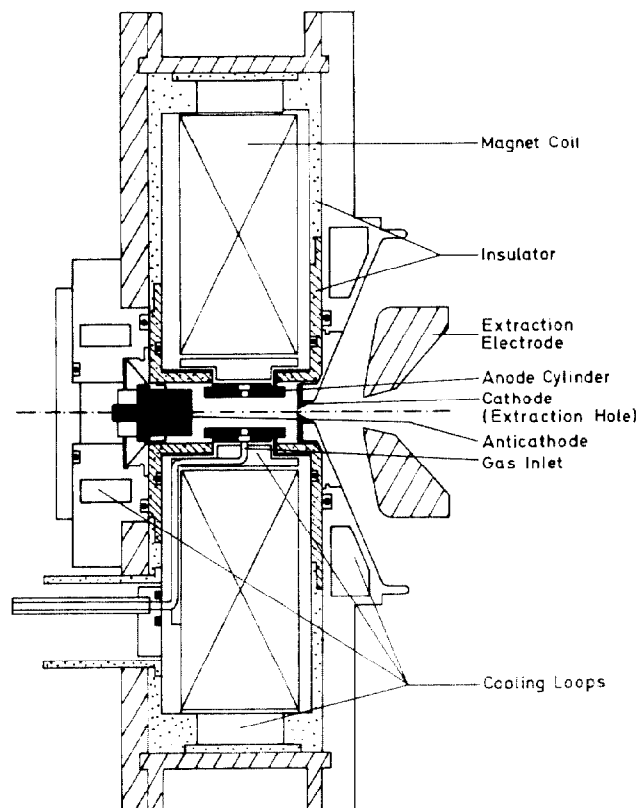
Sectional view of the principle parts of the axial PIG-source.
